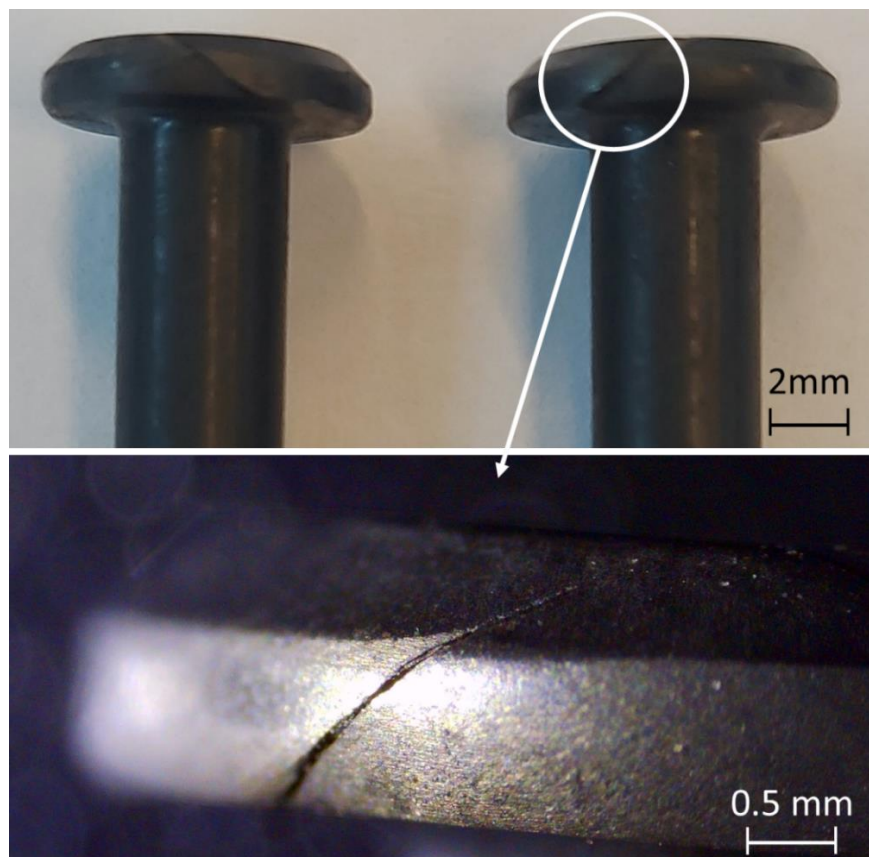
Cracked heads during warm forging manufacturing of the fastener
